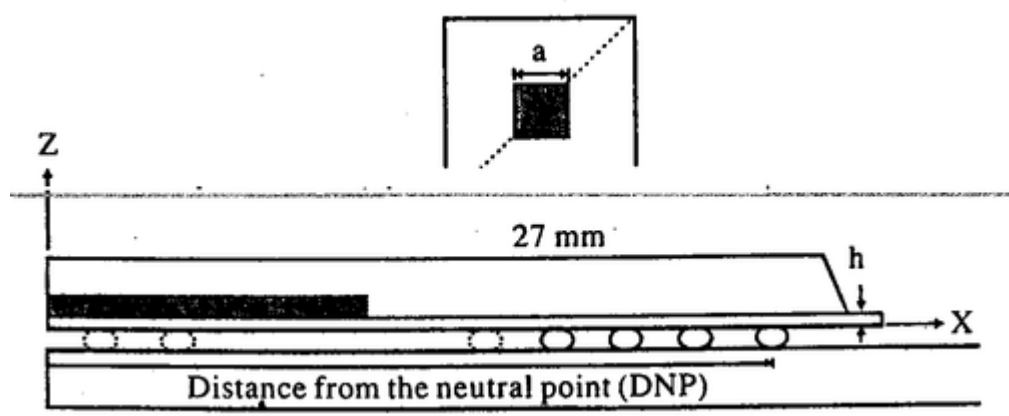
Schematic diagram of the diagonal cross-section of a PBGA-PCB assembly.
